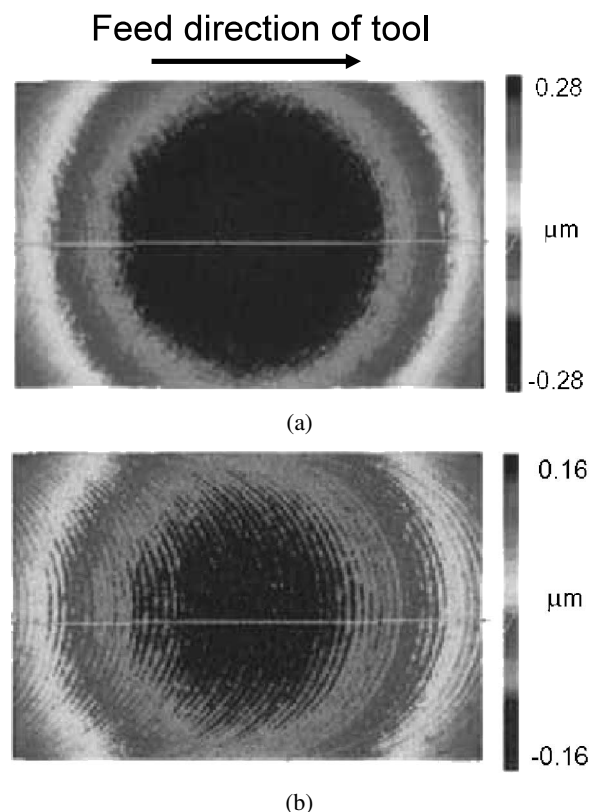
Surface profiles after the correction of the tilting of the tool. Radii of the desired surface are (a) 660 mm and (b) 1300 mm.
